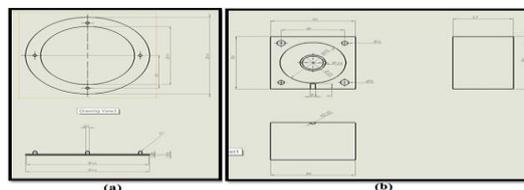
Orthographic Projection of (a) Cover Ring and (b) Mould Die
